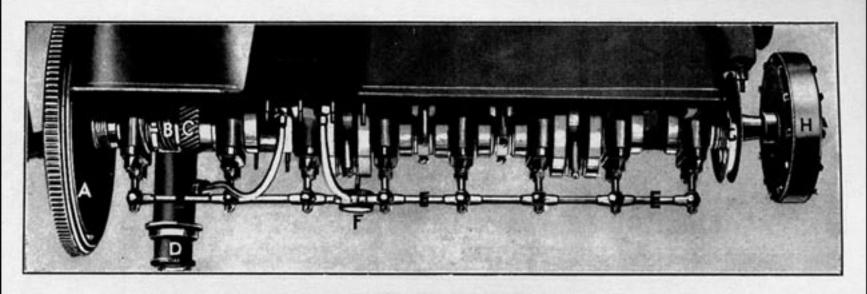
CRANKCASE WITH LOWER HALF REMOVED.
